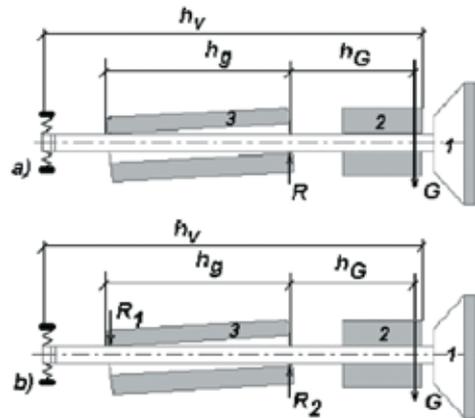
The scheme of loading for the valve - added mass - guide assembly; 1 - valve, 2 - added mass, 3 - guide; a) loading case, when reaction R between valve stem and its guide has existed in only one place, b) loading case, when reactions R1 and R2 between valve stem and its guide have existed in two places
